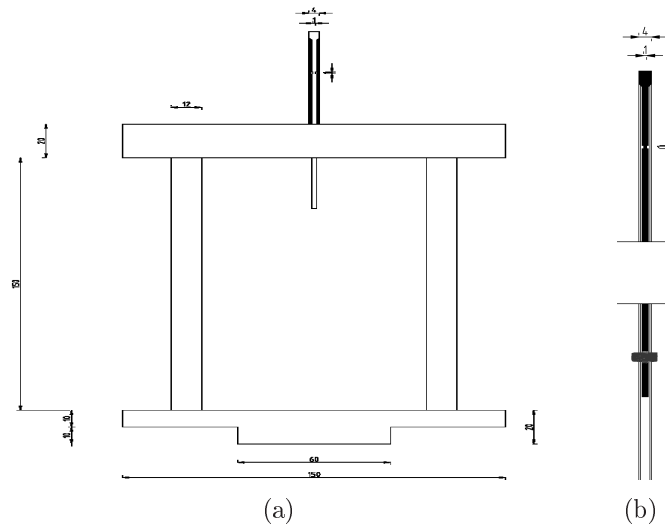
Load frame design figures. (a) shows the drawing for the 4-post load frame cage with sample and load bearing sleeve. The bottom plate is mounted directly to the nf-HEDM setup. Not pictured is the force generating stepper-motor and force sensor which sit between the two posts and is mounted to the bottom plate. (b) shows a close-up representation of the sample and sleeve design with pin inserted.
